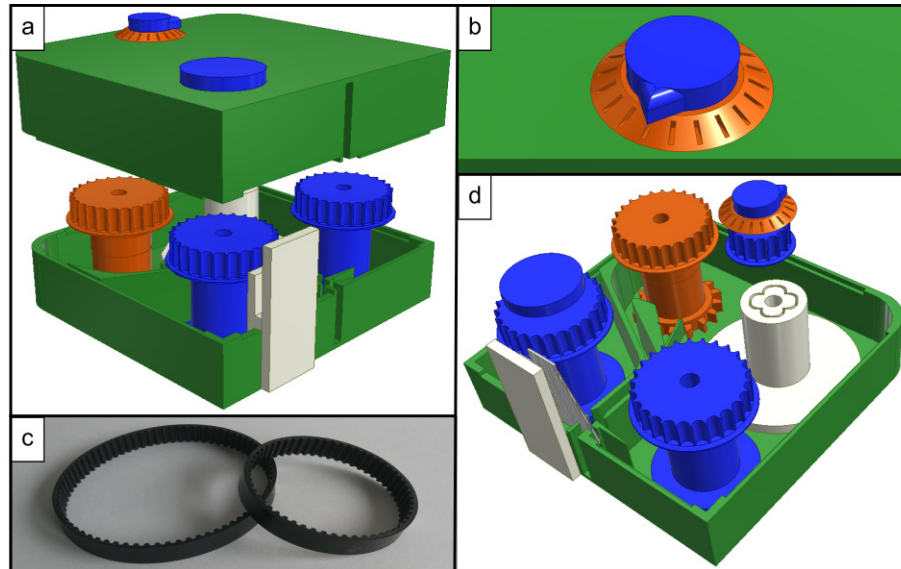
3D-CAD model of a dosing device draft using toothed belts for dosing of the ODF and coiling up the packaging waste in one step (a and d). 3D-CAD model of the dosing scale with dose indicator on the outside of the device (b). Toothed belts used in the device (c).
